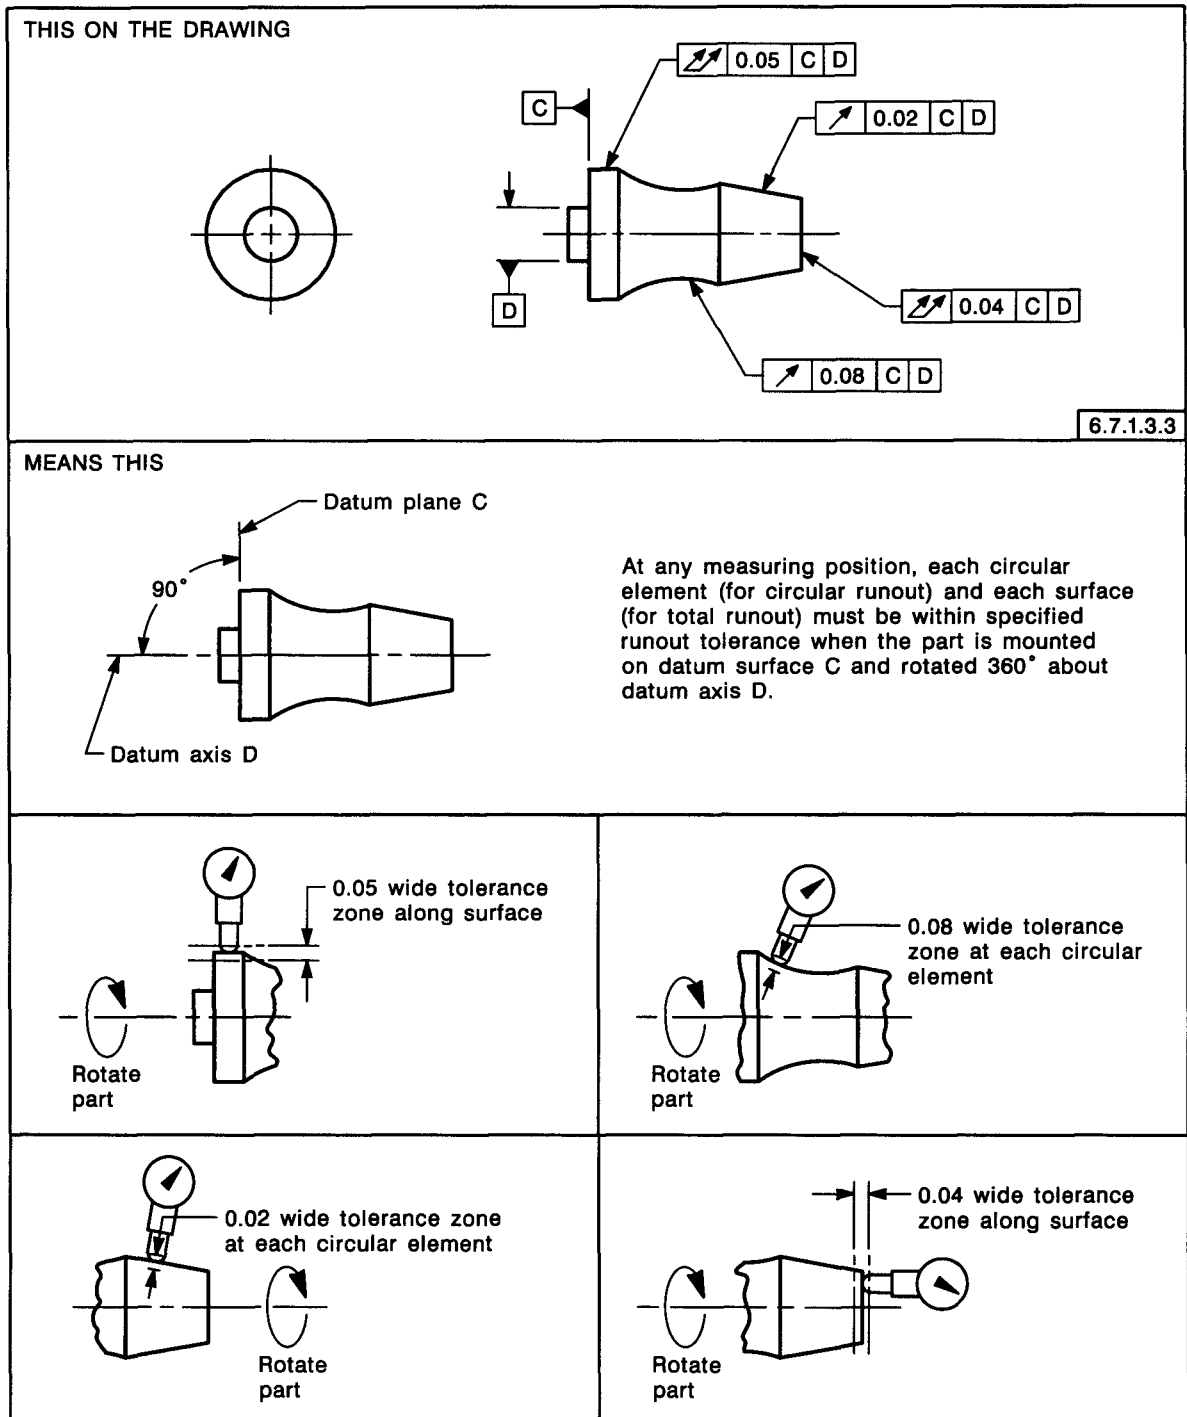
SPECIFYING RUNOUT RELATIVE TO A DATUM SURFACE AND A DIAMETER
